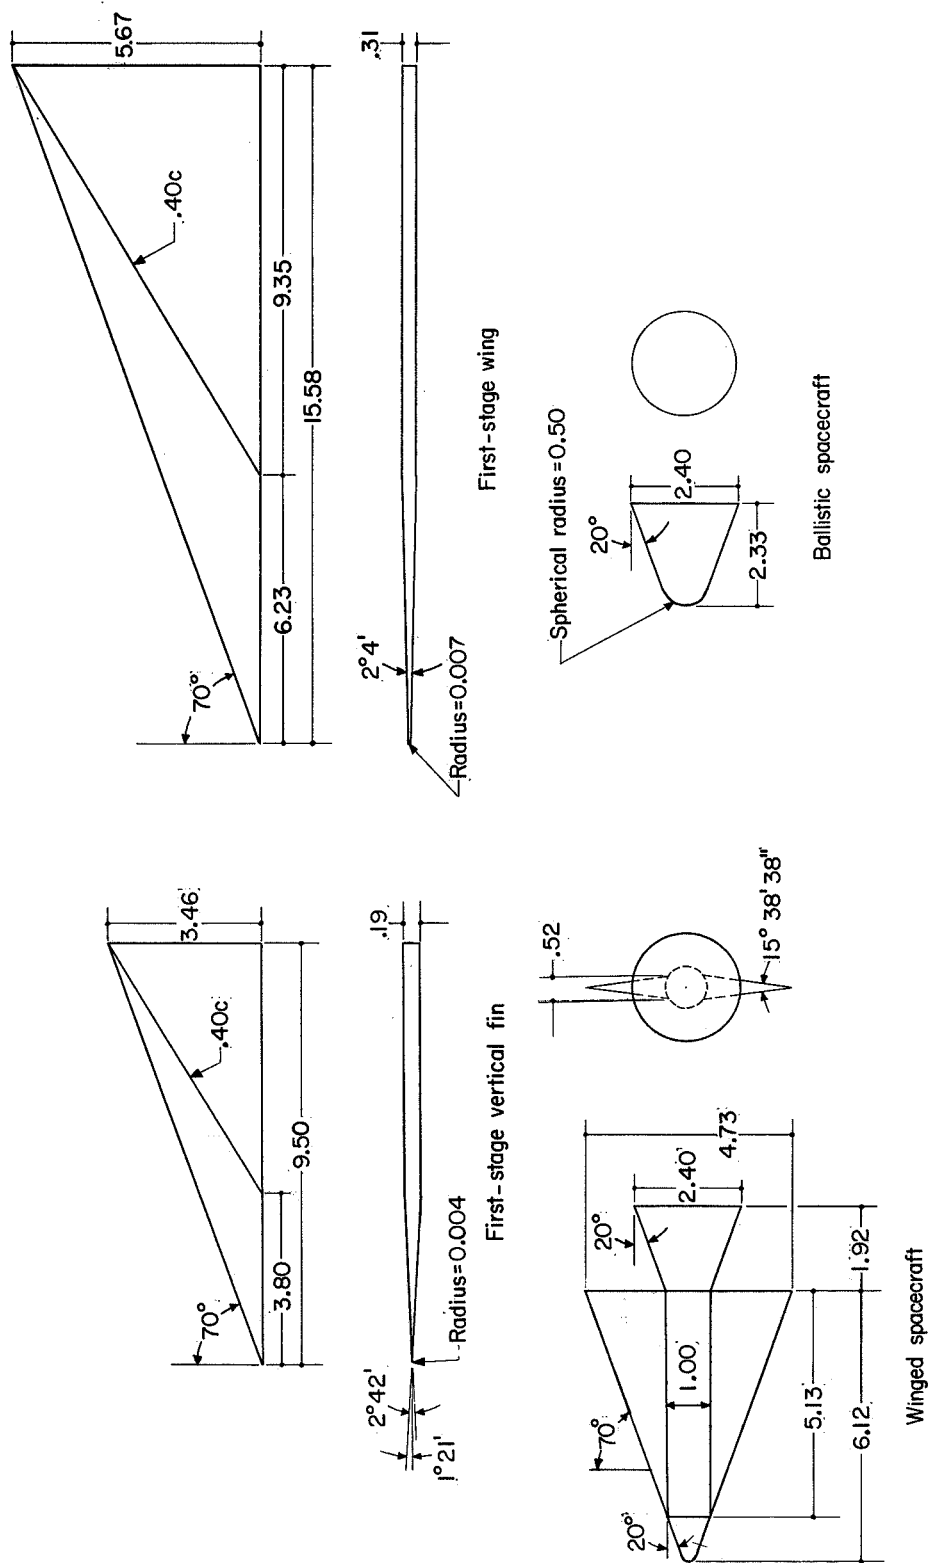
Model details and dimensions. All linear dimensions are in inches.
